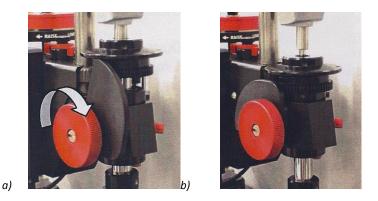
a) Spindle riser positioned UP; b) Spindle riser positioned DOWN.
